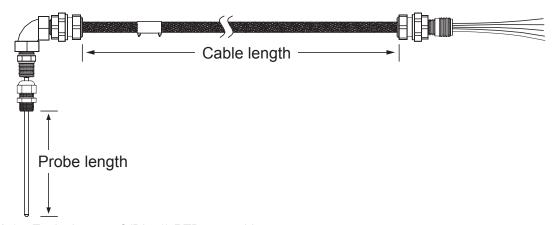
Explosion-proof (Div. 1) RTD assembly
